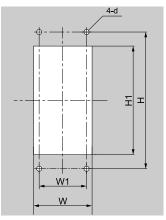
Panel Cut-Out Dimensions to Attach Inside Control Panel
